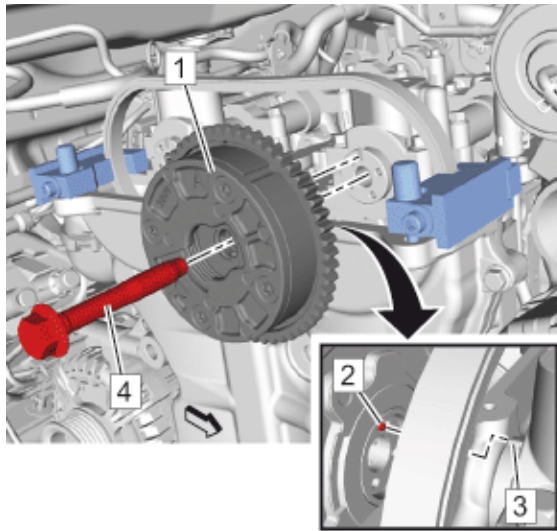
Exhaust Camshaft Position Actuator, Dowel Pin, Camshaft And Bolt
